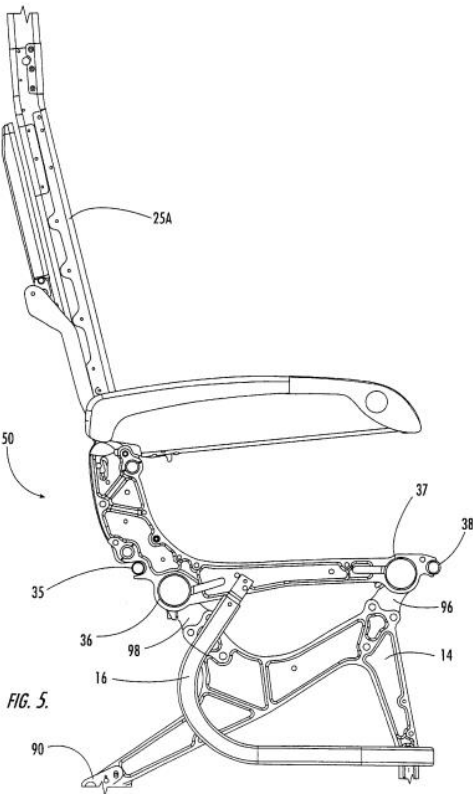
Passenger seat construction: 14 – leg modules; 16 – baggage guard rail; 25A – pan; 35, 37,38 – beam elements; 50 – ladder frame assembly; 90 – counterclockwise direction; 96,98 – joint clamps.
